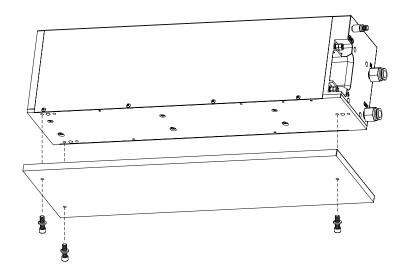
Pulstar p100 mounting locations (1/4–20 fastener locations shown)
